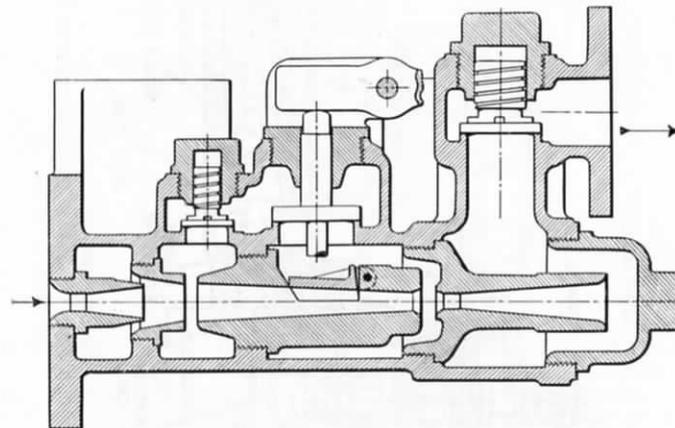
METCALFE HOT-WATER INJECTOR, SECTION THROUGH NOZZLES AND VALVES.
